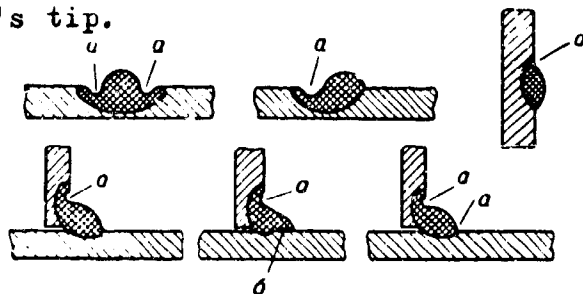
External Flaws in Welded Seam: a - undercuts; and b - nonfusion.
